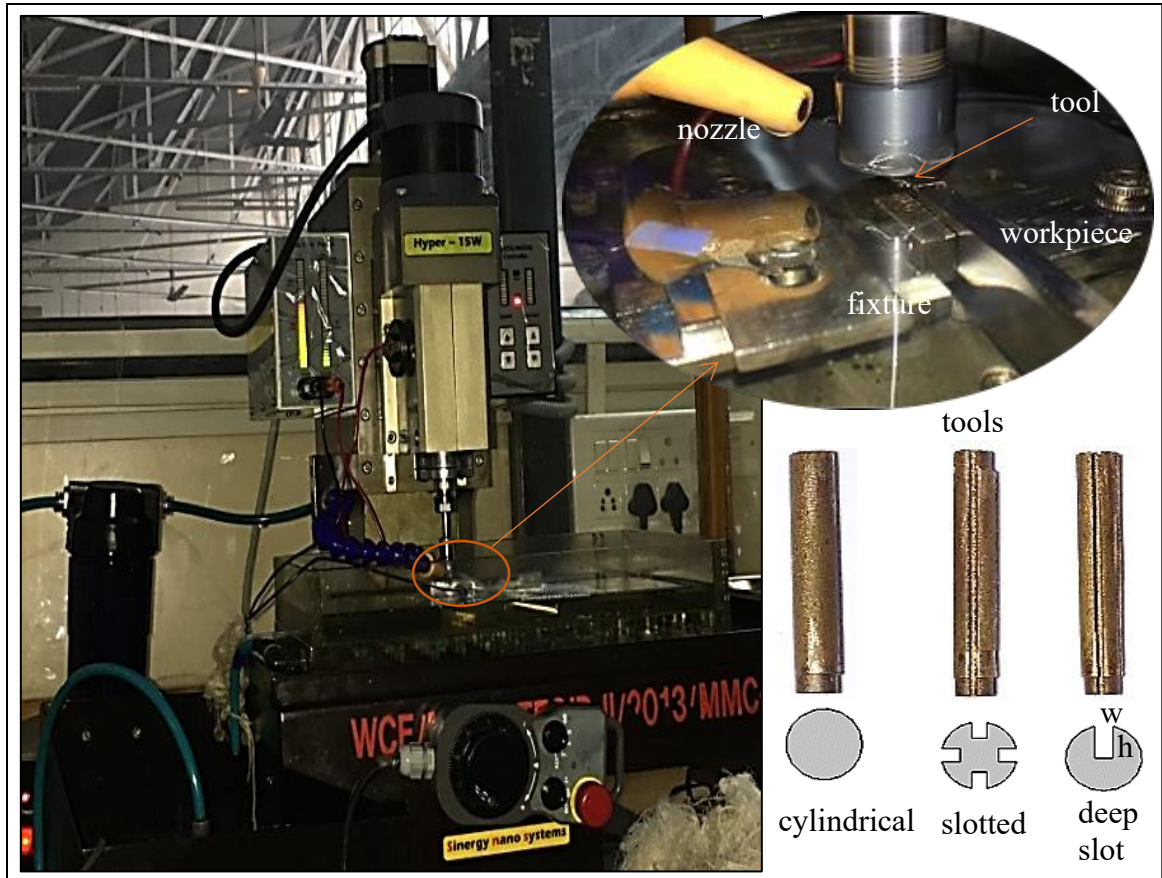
Setup using Hyper 15 machine and tools used for experimentation
